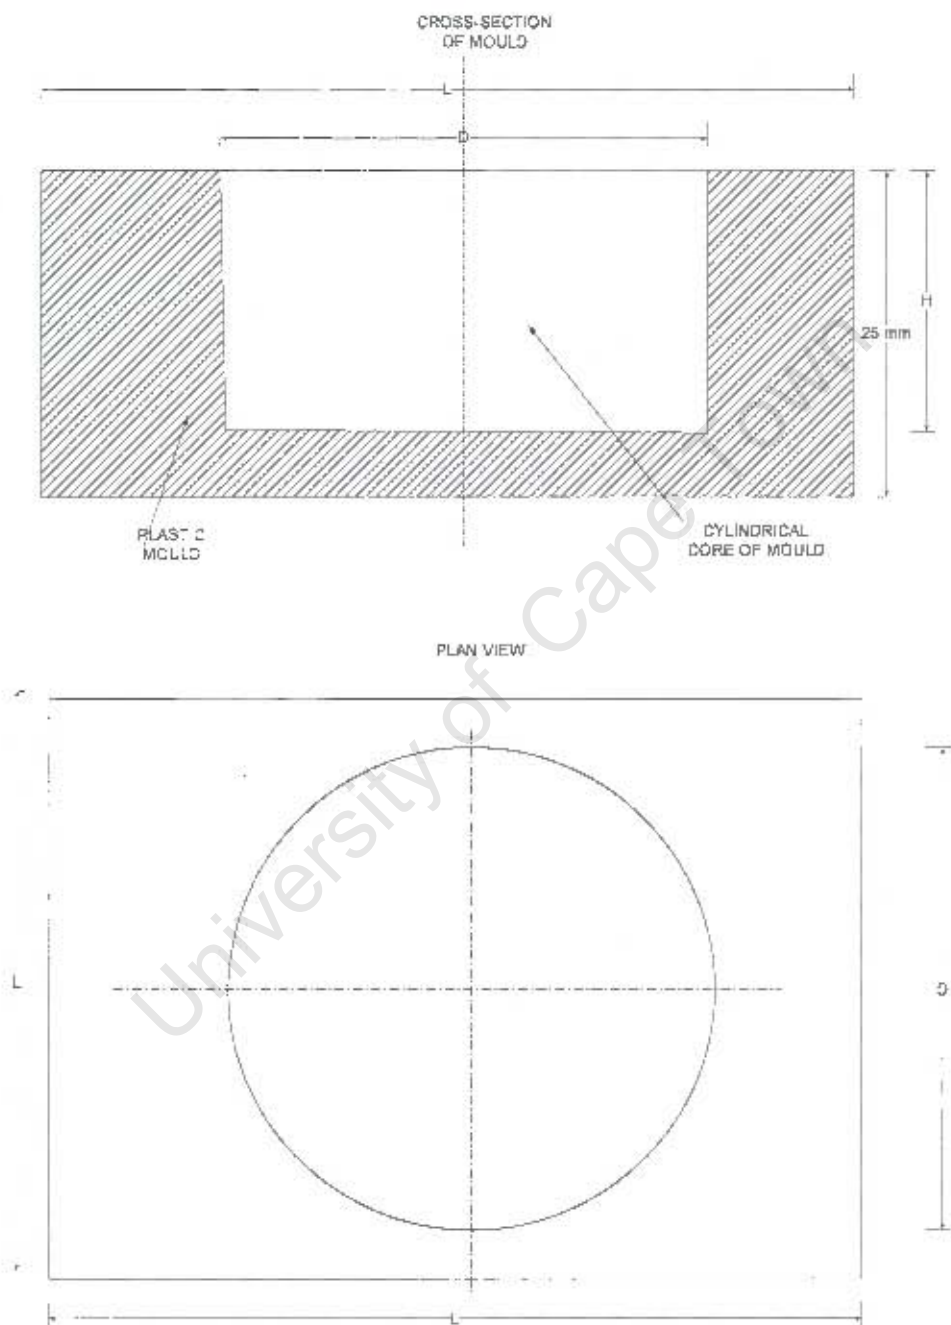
Schematic of cross-section of a CY explosive mould.
